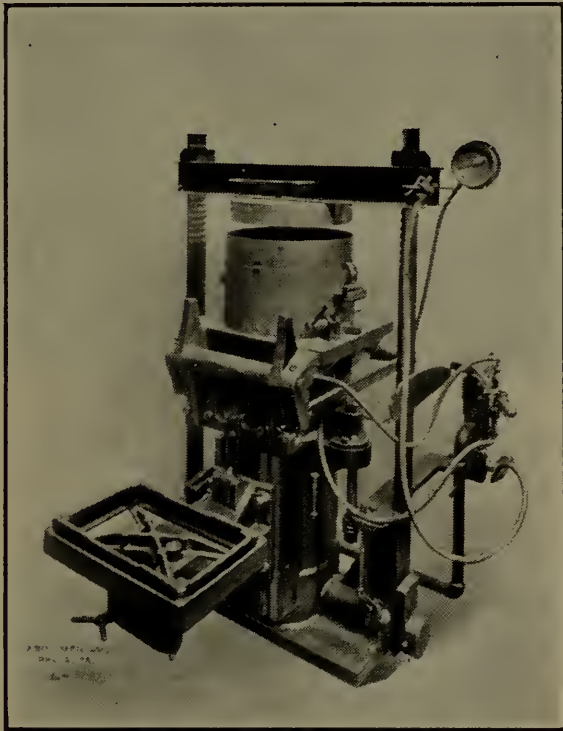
Jarring, squeezing, roll-over and pattern drawing molding machine.
